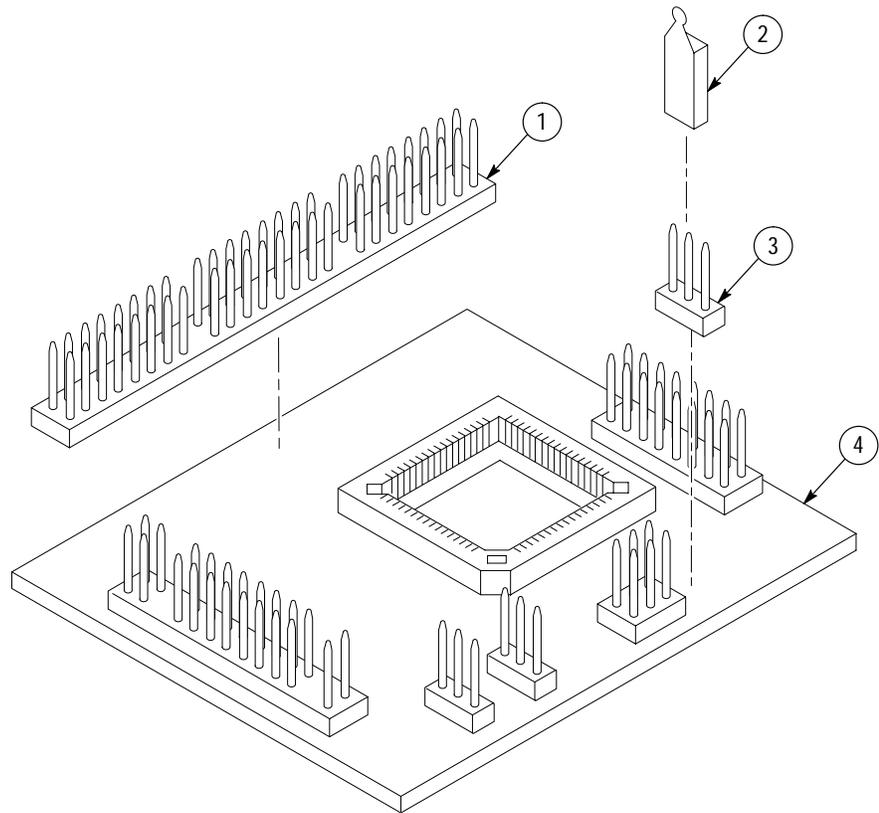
8096, 80196 and 80C196 PLCC probe adapter exploded view
